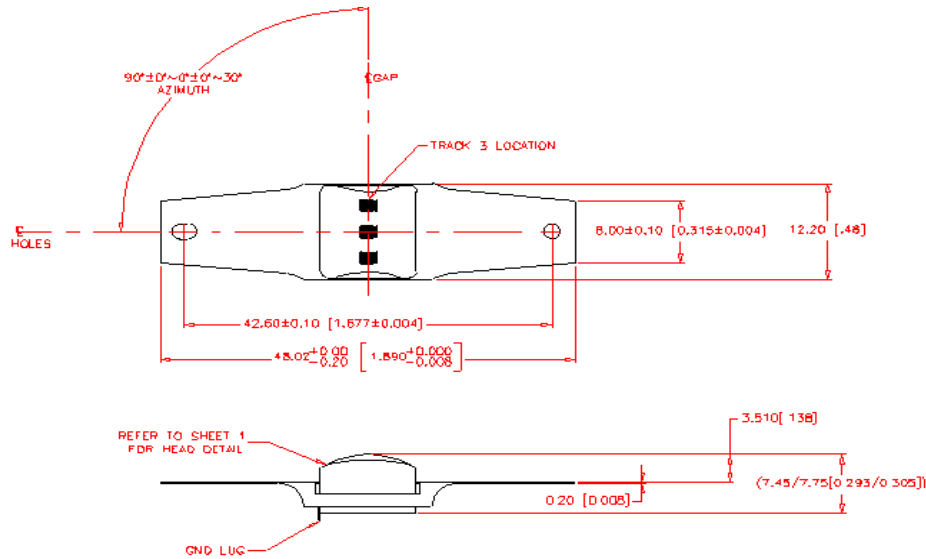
Standard Magnetic head assembly showing tolerances of Azimuth
